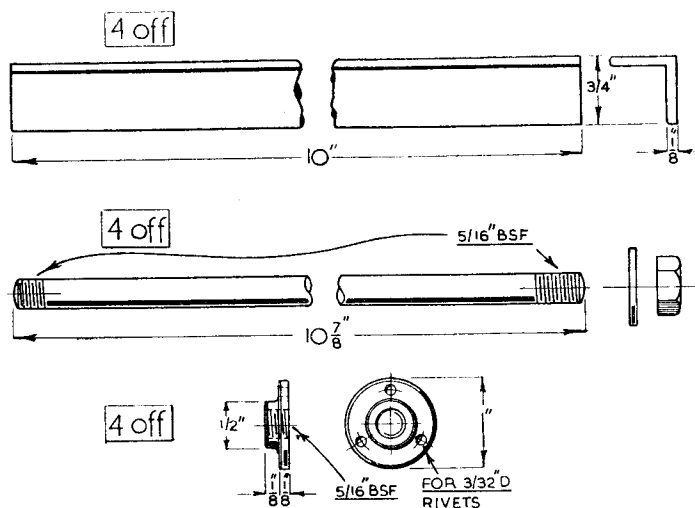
The angle-iron distance-pieces and the stretchers with their bushings
